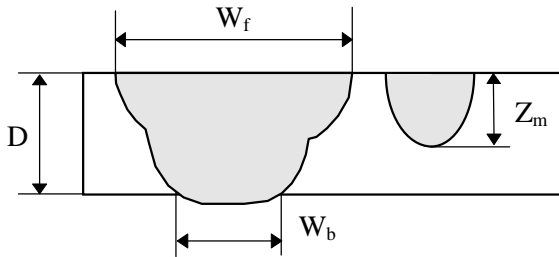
Characteristic dimensions of weld beads (cross-section representation)
